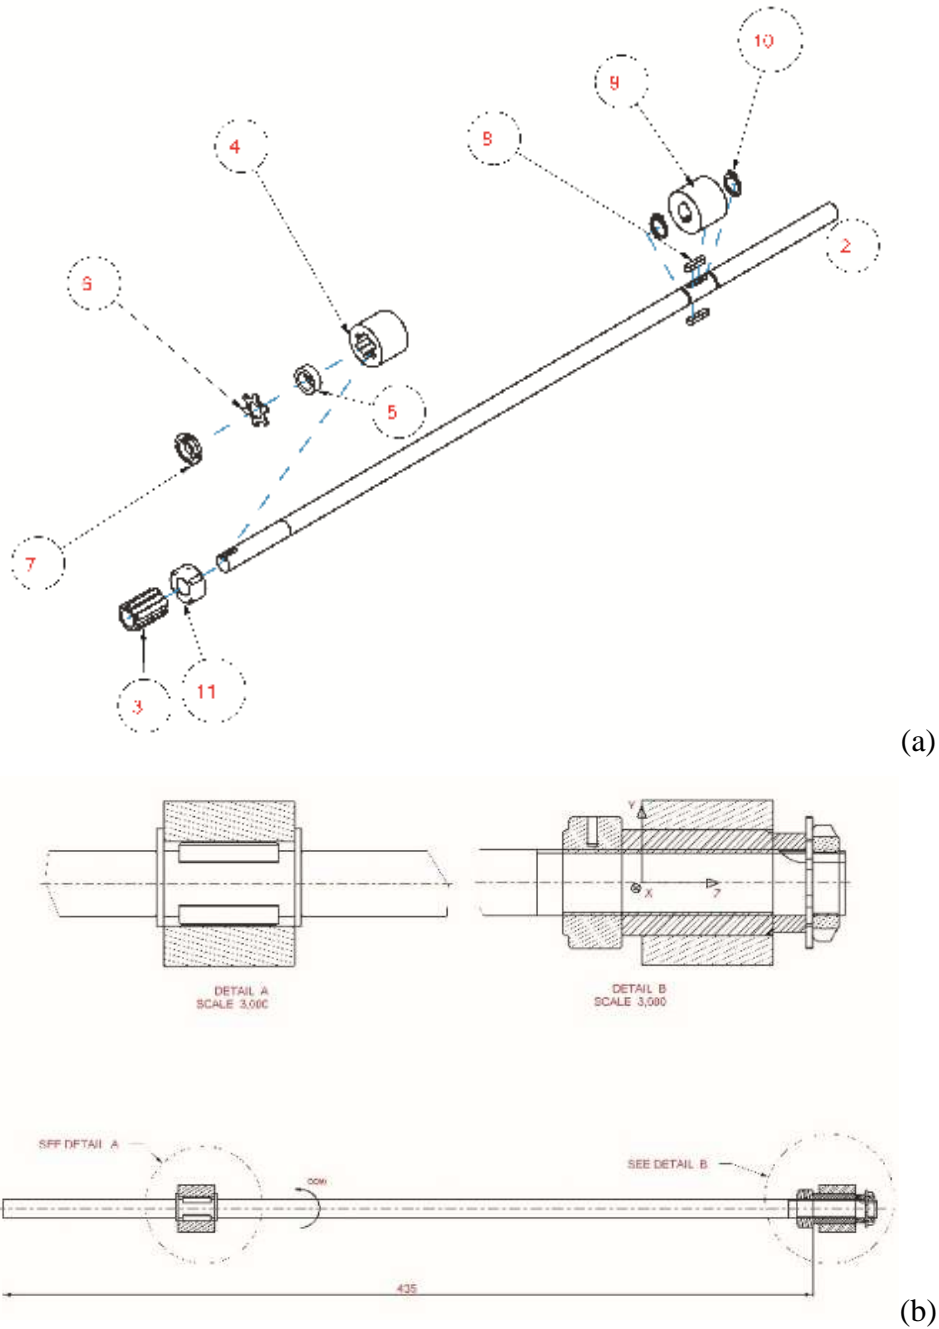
Shaft designed for the modified RK: a) exploded view, b) section. The following components are shown: 2–shaft; 3–splined connection; 4–splined hub (journal 1); 5–spacer; 6–safety washer; 7–threaded locking nut; 8–key; 9–hub with keyways (journal 2); 10–retaining ring; 11–lock nut with locking screw
